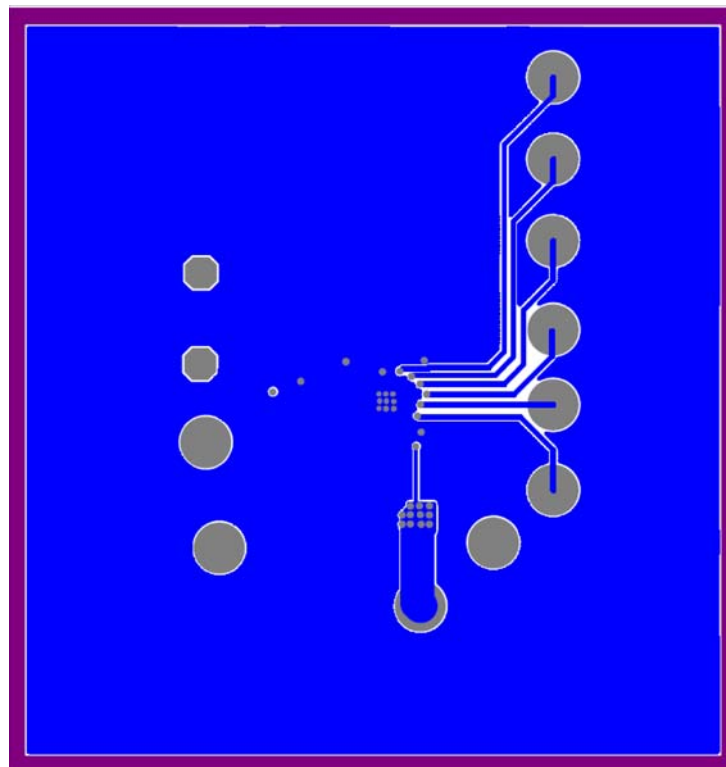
PCB LAYOUT (BOTTOM LAYER) OF ISL97693IRTZ-EVALZ SMALL EVALUATION BOARD
